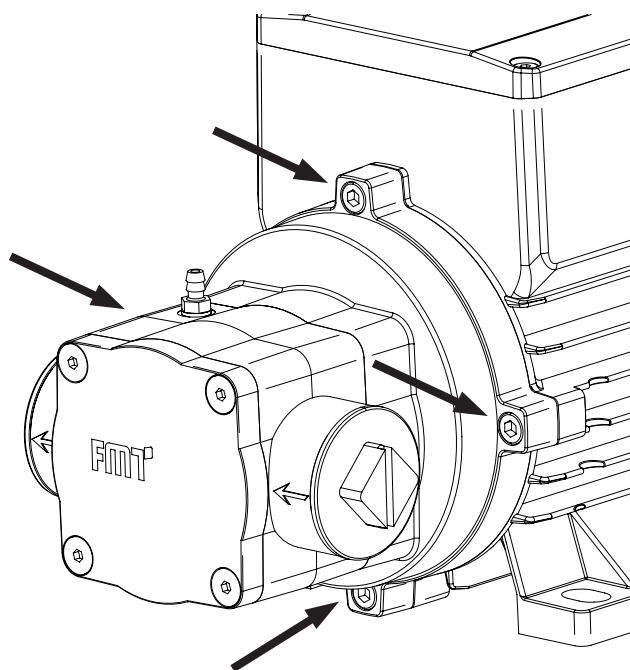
2: Position of the screws for changing the assembly of the pump unit
